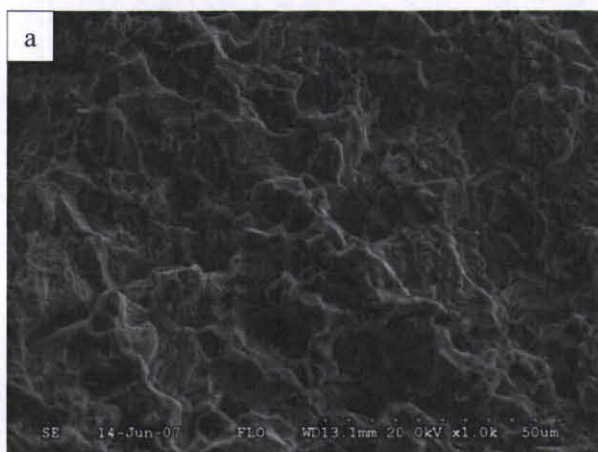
Representative pictures from fracture surface Bolt 2.
